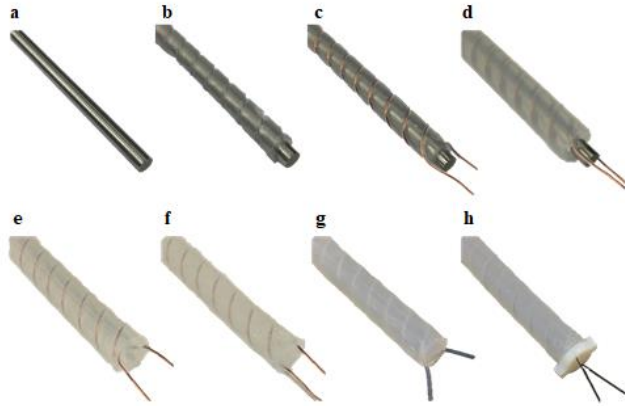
Prototyping of soft actuator with helical path using sequential casting method. (a) Metal pin is prepared. (b) Inner layer molding result. Helical groove is on the surface. (c) Teflon tube with enameled wire inserted is wound around the inner layer. (d) Outer layer molding result. (e) Metal pin is removed. (f) Core layer curing result. (g) Enameled wire is removed. (h) Teflon tube is removed after inserting wire into Teflon tube. Wire anchoring support is attached.
